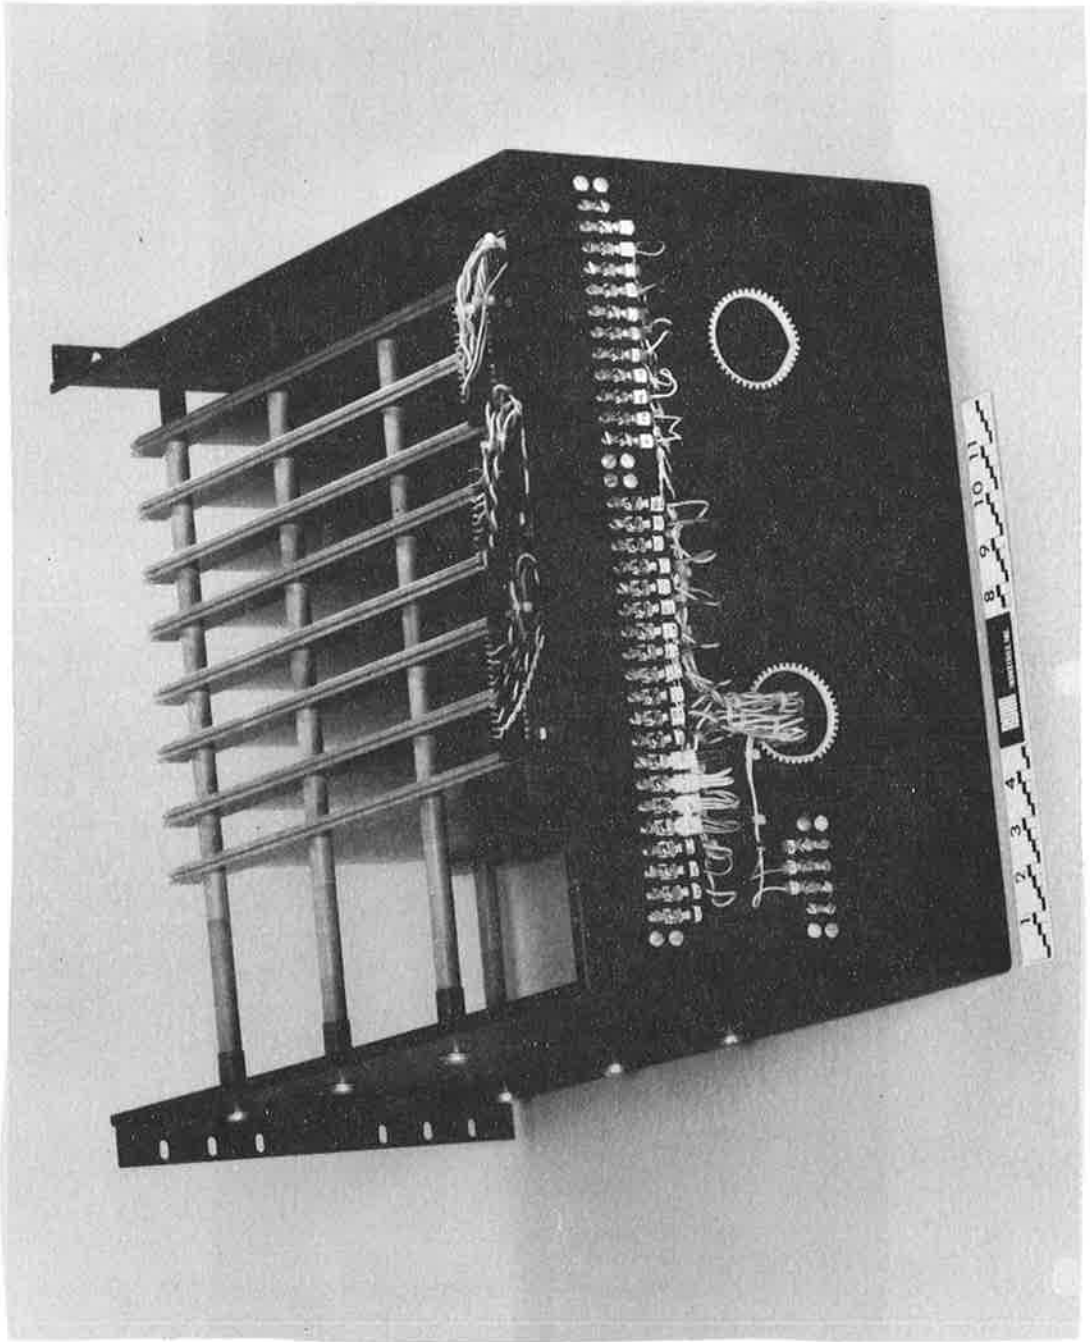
REAR OF DRIVER POWER SUPPLY ASSEMBLY NO. 1
